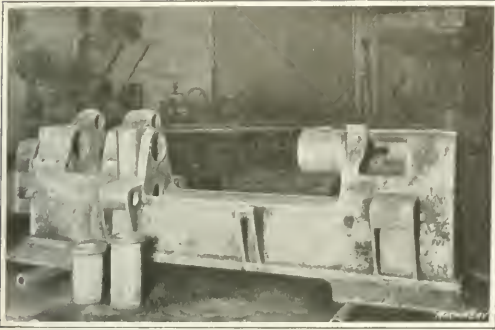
Lathe-bed Casting ready to have Bearings and Ways assembled in Place. Note Headstock Spindle Bearings standing on Floor
